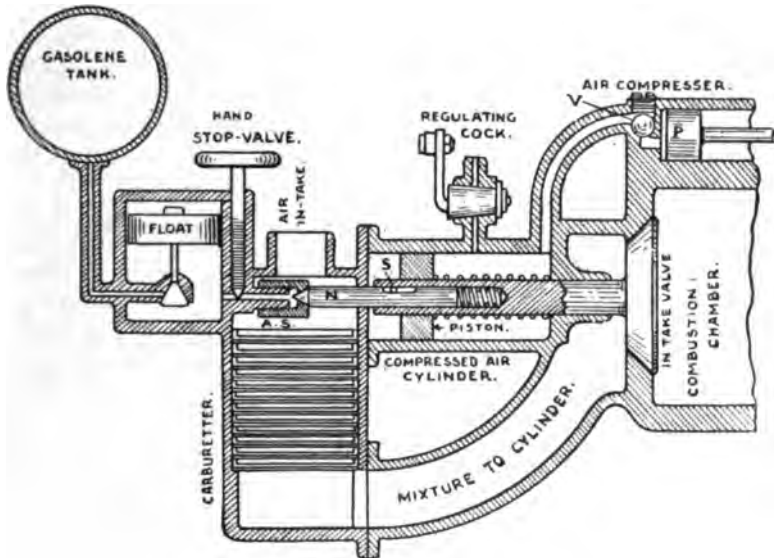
Diagrammatic Sketch of Winton's Carburettor and Intake Valve Action. The air compressor piston, P, is driven directly from one of the motor pistons, and forces air past the check valve, V, into the compressed air cylinder, where it operates to hold the piston to the left, and keeps the intake valve closed, regardless of the piston suction tending to open the valve by moving it to the right. By means of the regulating cock the pressure may be reduced in the air cylinder, thus permitting the intake valve to open, more or less as the air pressure is more or less reduced in the cylinder. The needle valve, N, is seated in and carried by the intake valve stem, is spring pressed to the left by a coiled spring at its right end, is retained by a cross pin, S, and co-acts with the adjustable seat, A, S, to close or open the passage of gasoline from the float chamber to the carburettor underneath. Whence the mixture is drawn to the cylinder through the intake valve. No gasoline can go to the carburettor without the motor piston is moved, and more or less gasoline goes to the carburettor as the intake valve is lifted more or less. The regulating cock governs the action of the motor by determining the amount of air that is allowed to escape through the vent. It corresponds to the set governor valve (7) in the previous figure. This cut, reproduced by courtesy of the "Automobile Trade Journal," shows only the theory, not the exact arrangement of the parts.
